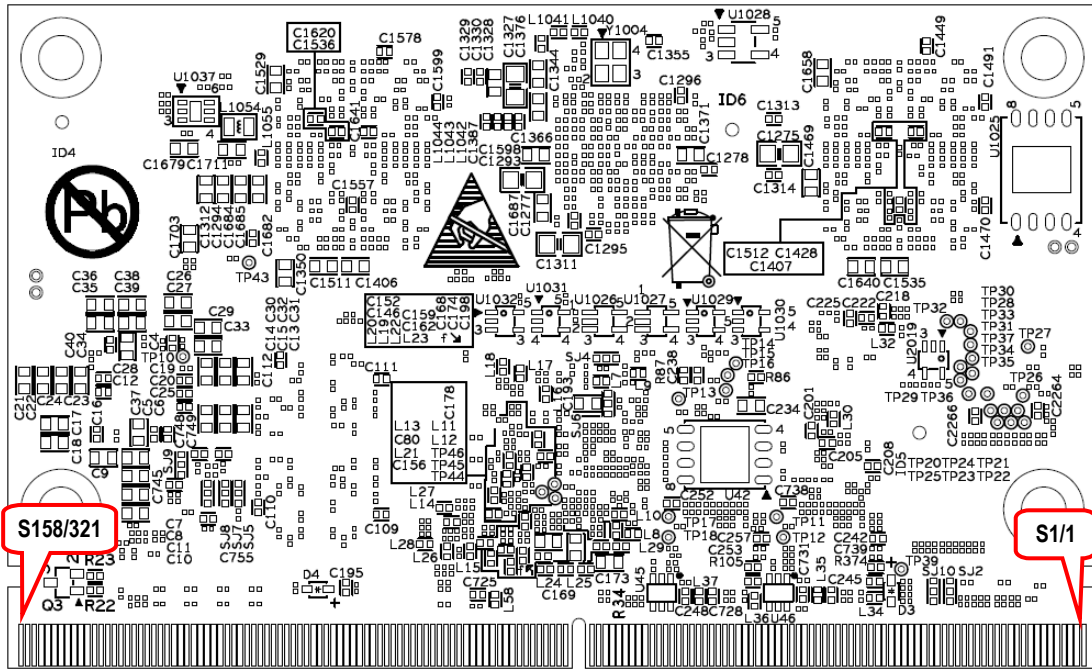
EACOM Board Pin Numbering, Bottom Side
